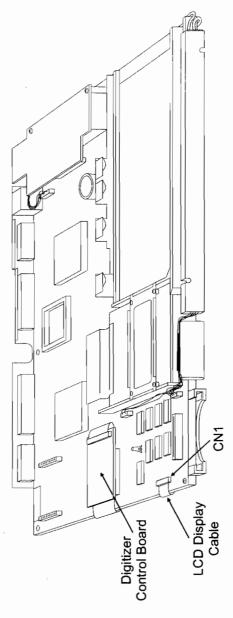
Connecting or Disconnecting the LCD Cable and the Digitizer Control Board
